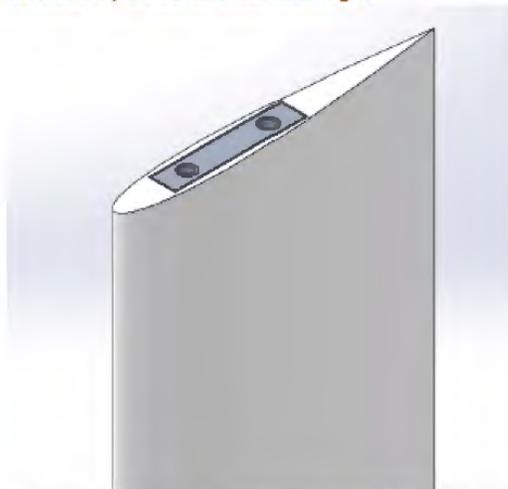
Solidworks model of the mast showing the 3D printed outer shape and the barstock core.
